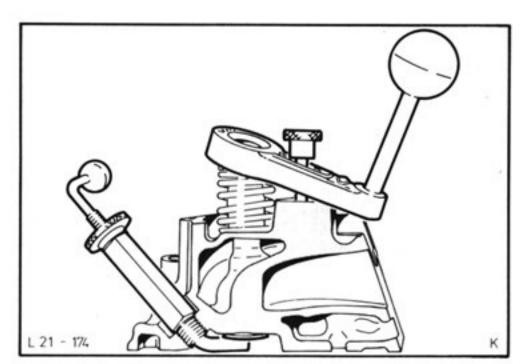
Removal of the valve spring with Special Tools 21-056 and 21-057.
